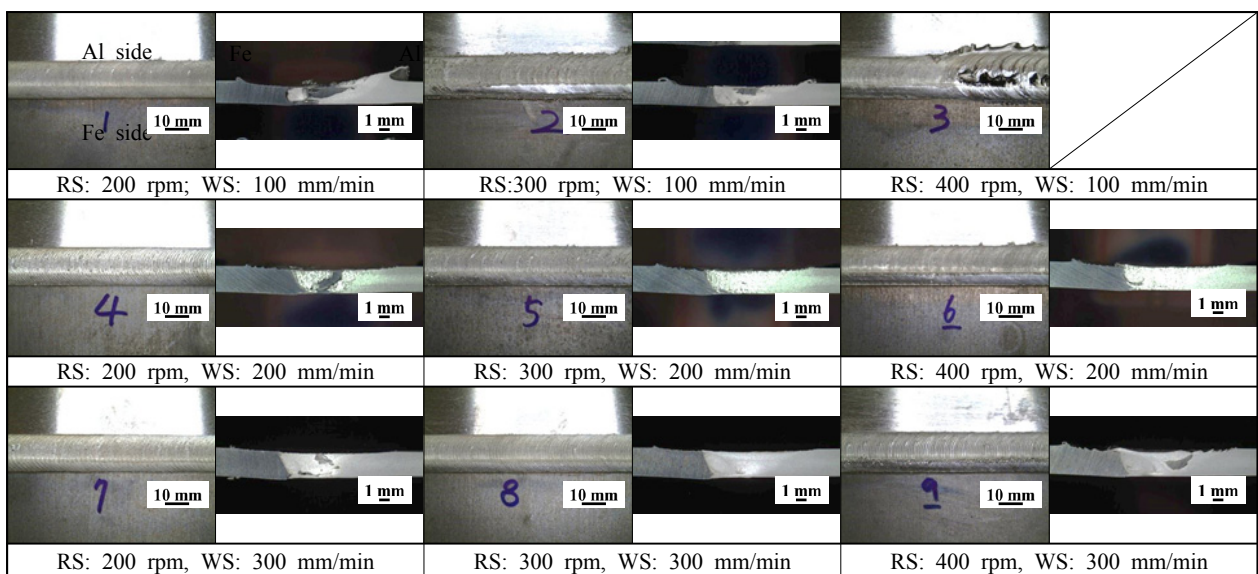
Weld bead surfaces and cross-sections according to welding parameters (2.0 mm-thick specimen, RS: tool rotation speed, and WS: welding speed)
